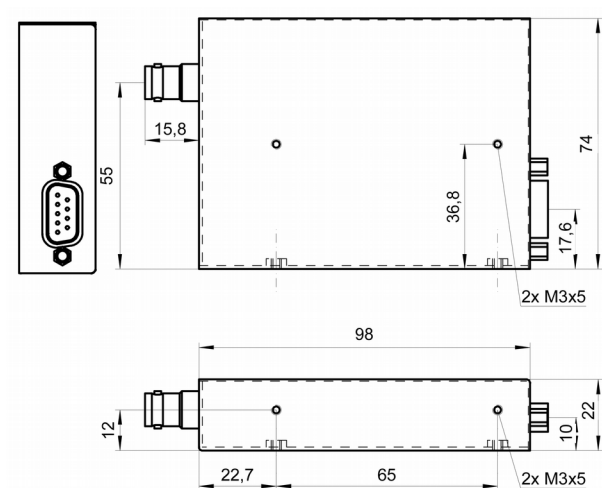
dimensional drawing DPSmini = 8kV / SHV
